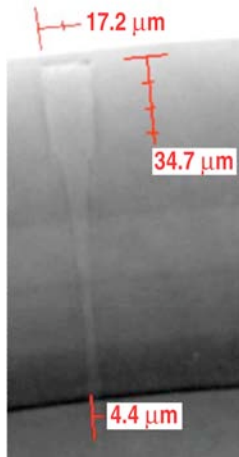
X-ray image of laser drilled counterbore hole in beryllium capsule.
